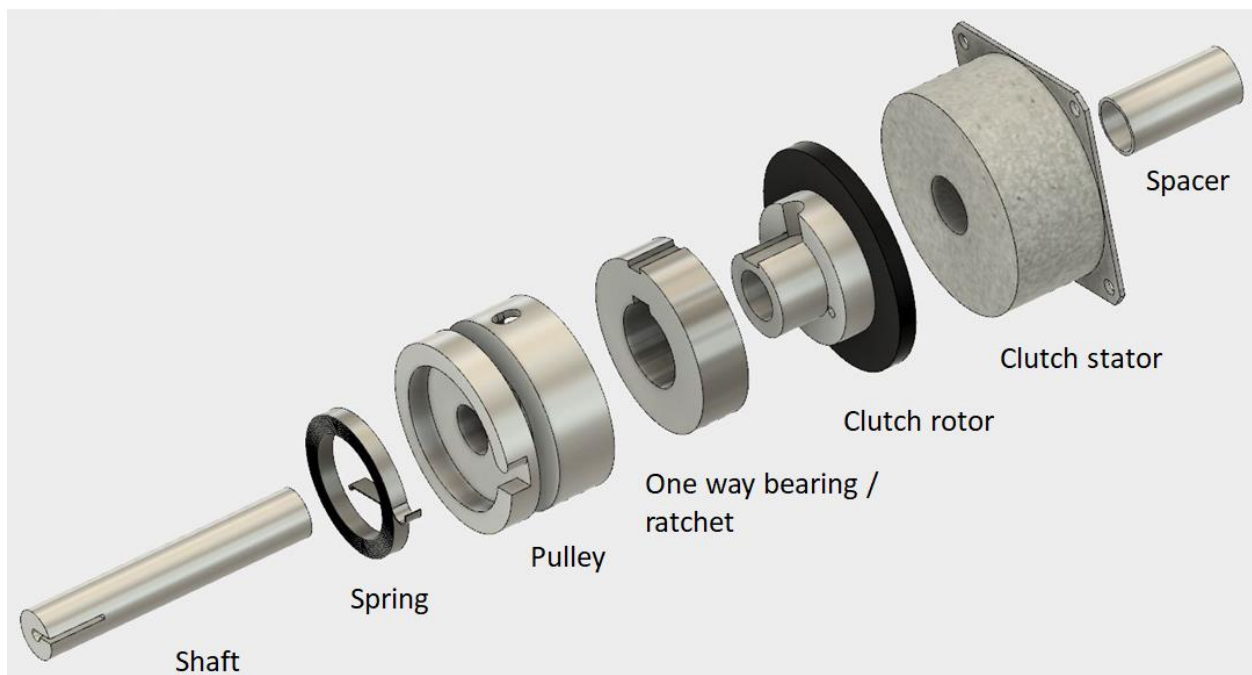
Exploded view of clutch components. From left to right: shaft, torsional recoil spring, recoil spring housing & string pulley, ratchet (one-way) bearing, EM clutch rotor, EM clutch stator.
